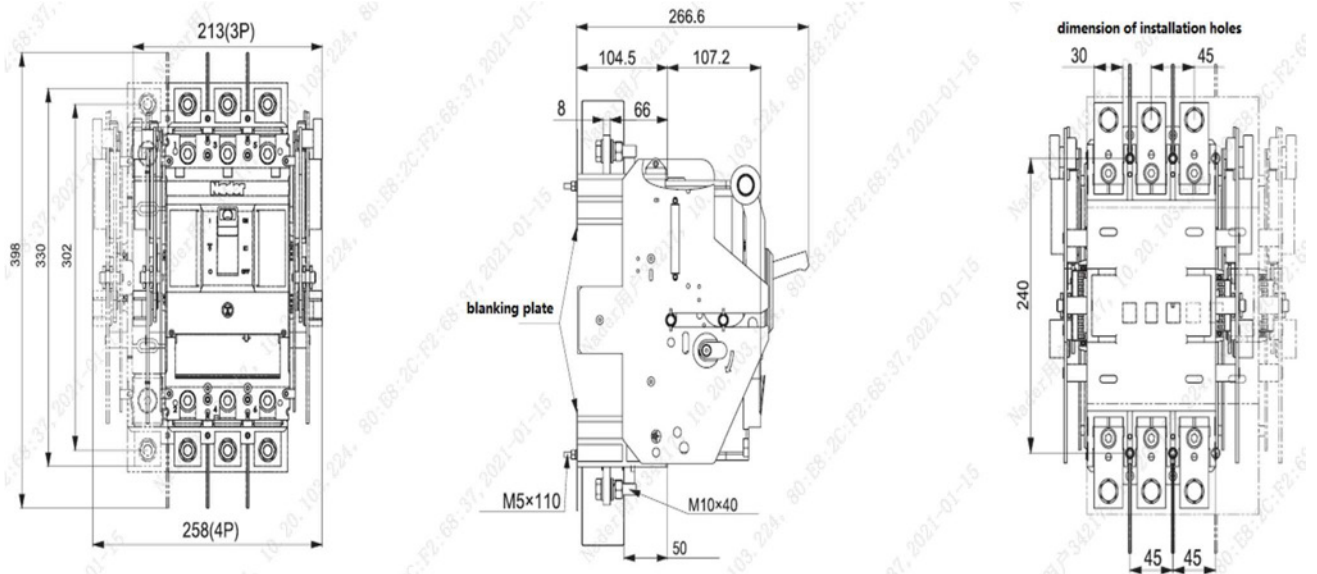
Outline and installation dimensions of 3-pole and 4-pole front panel connection products with drawer
